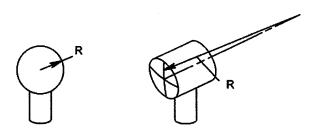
Noncylindrical locating pins. (a) A conventional ball pin and (b) a pin with a cylindrical top element bearing a long spherical radius at one end to contact the optic. (From Yoder.²¹)
